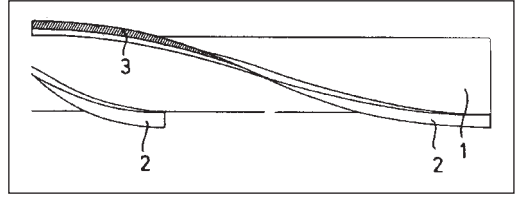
A shearing roller with helical steel blades (2) and file profile (3) (according to Heusch).
